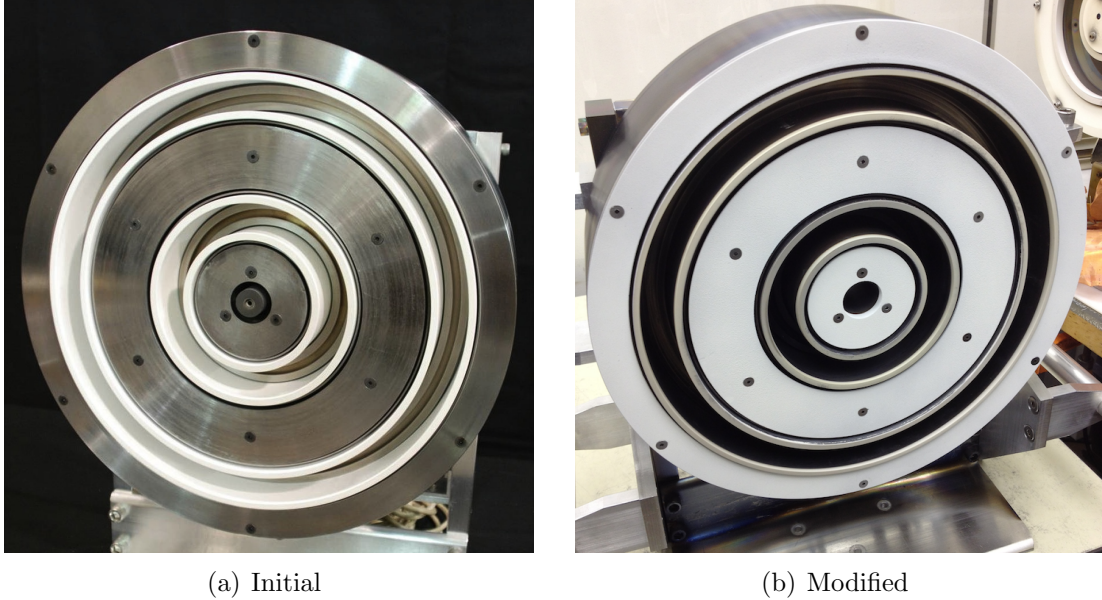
X2 after initial assembly and after modification to pole surfaces
